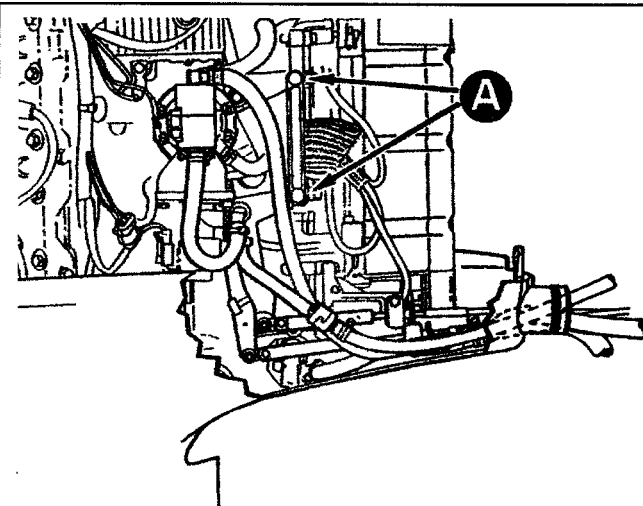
Throttle and shift linkage lubrication points-200-250 hp V6 FICHT motors
